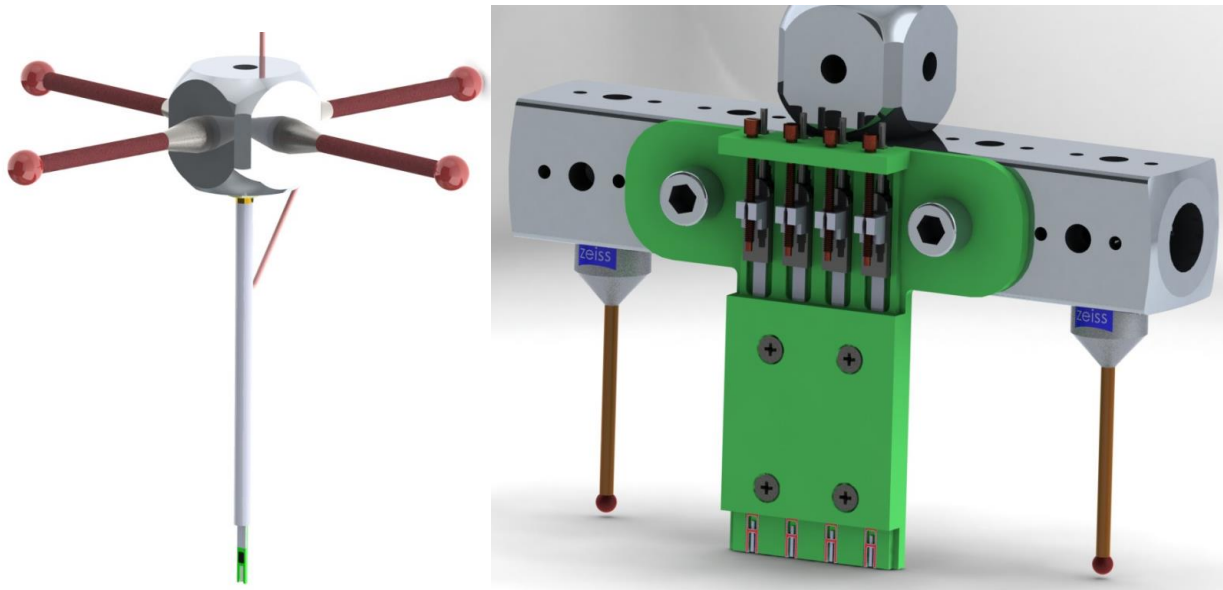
3-axis single-probe (MMS-1i-CMM) and 3-axis four-probe array (MMS-4i-CMM) mounted on the standard CMM holder together with touch probes
